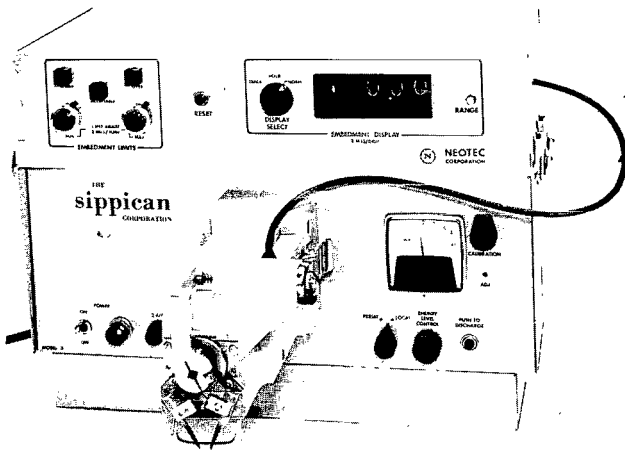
Weld quality monitor attached to pincer-type welding head.
